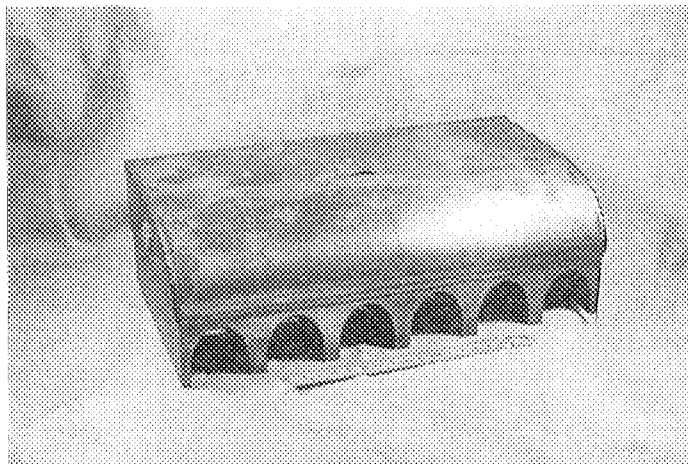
Welded canning for Be HIP joining process
